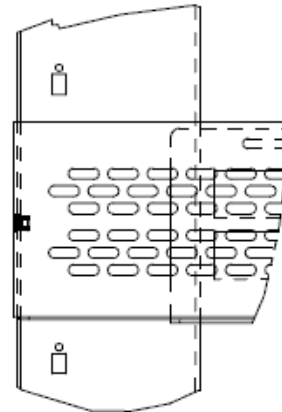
Installing the Rack-Mount Rail Kit Rail Assembly, Left Side Shown
